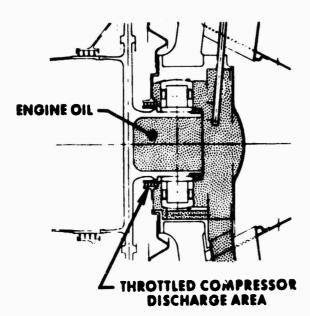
Continental Model 357-1 Rear Bearing Oil Seal.
